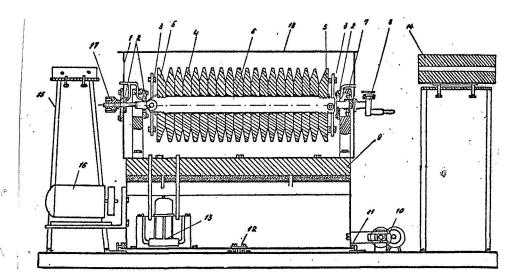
Cross section of monochromator designed by Senchenkov and Kuznetsov: 1 — aluminum window; 2 — rotor bearings; 3 — speed regulator; 4 — disks; 5 — end disks; 6 — motor shaft; 7 — tachometer; 8 — vacuum installation cock; 9 — bedplate; 10 — bedplate rotating mechanism; 11 — transmission; 12 — bearings; 13 — oil pump; 14 — detector housing; 15 — collimator support; 16 — electromotor; 17 — rotor transmission; 18 — evacuated enclosure.
